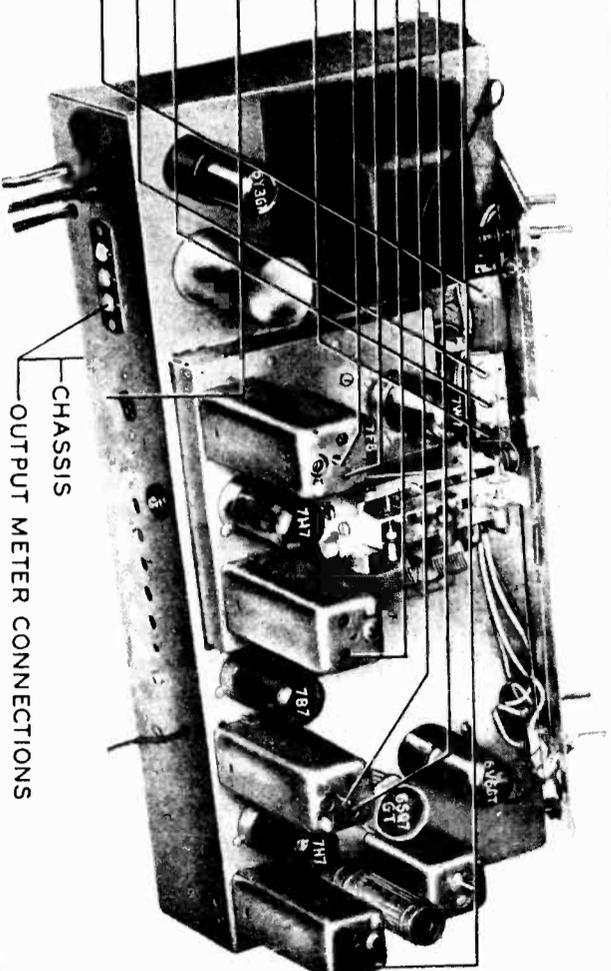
CHASSIS VIEW, SHOWING AM TRIMMER LOCATIONS.
